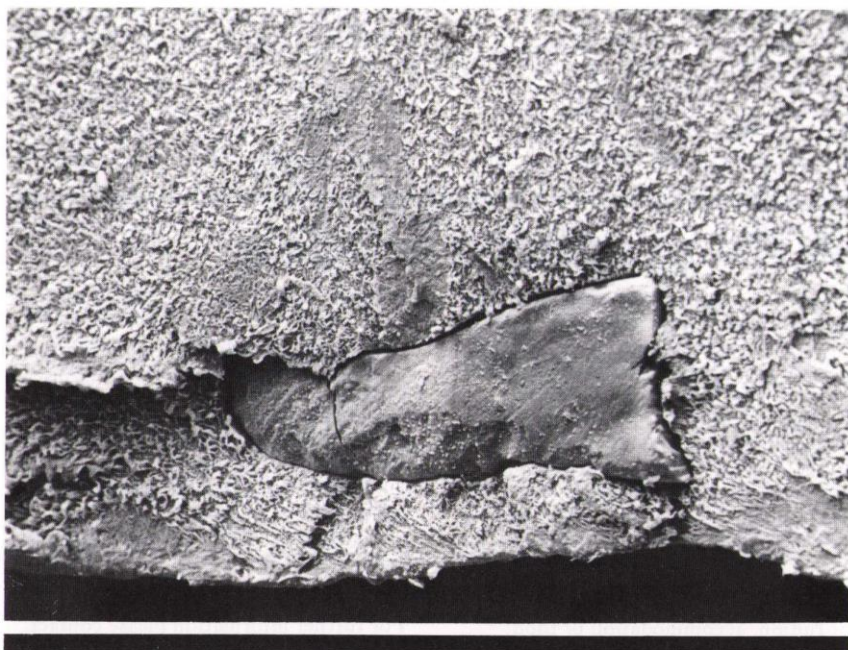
Example of a particle that initiated the fracture of a polyethylene pipe.
